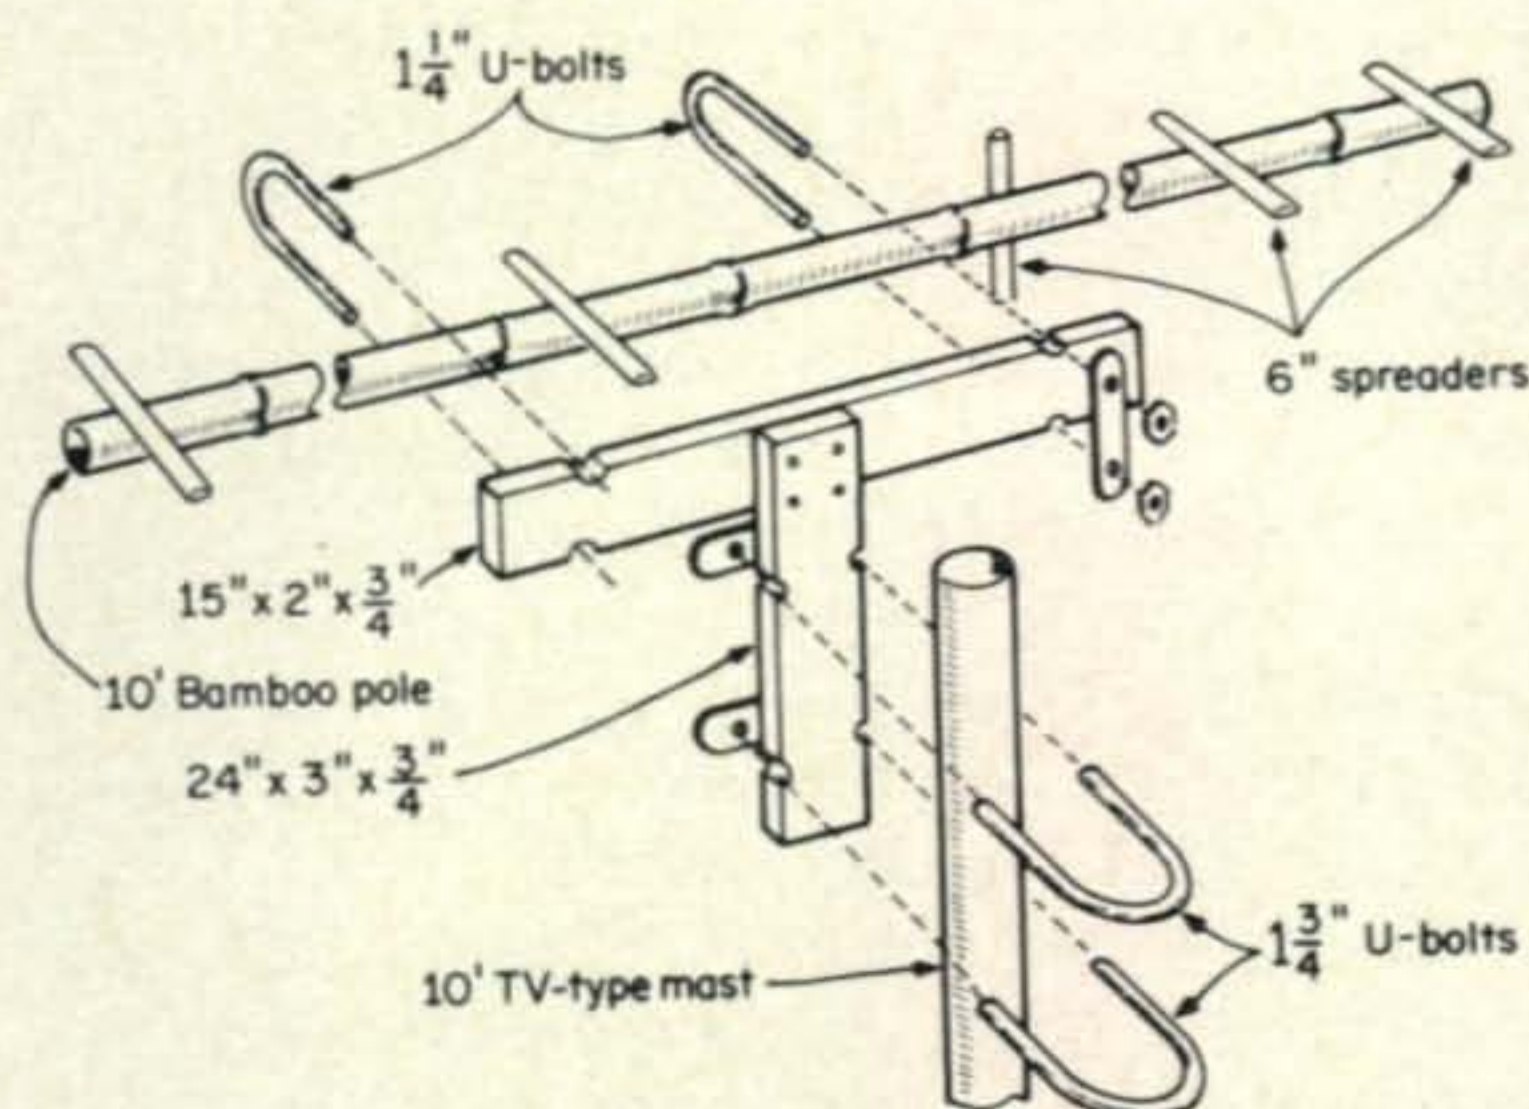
Center boom construction. See text for detailed assembly instructions.
